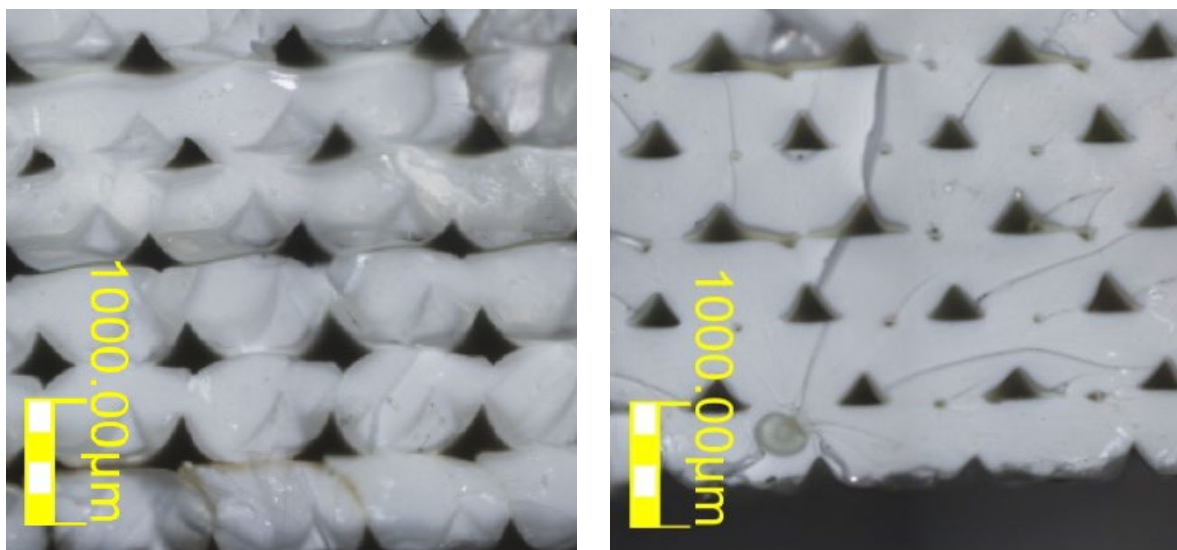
Cross section of samples fabricated using the aligned (left) and offset method (right) for the 1.2mm nozzle size.
